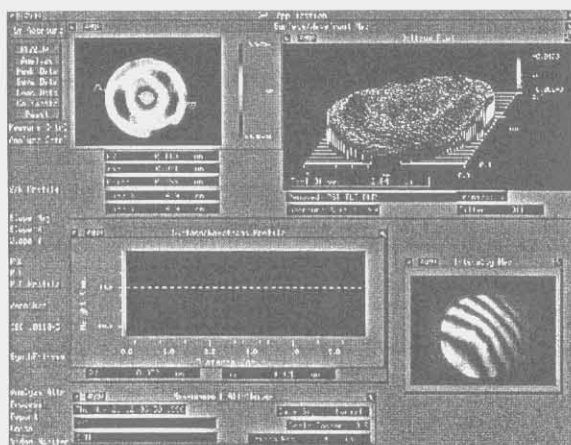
Form accuracy measurement using non-contact type laser interferometric profiler
